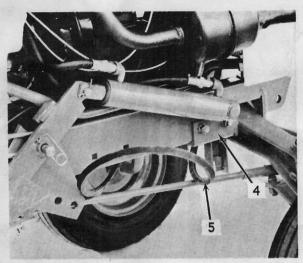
Installing the Front Mounting Brackets and Drive Belt
